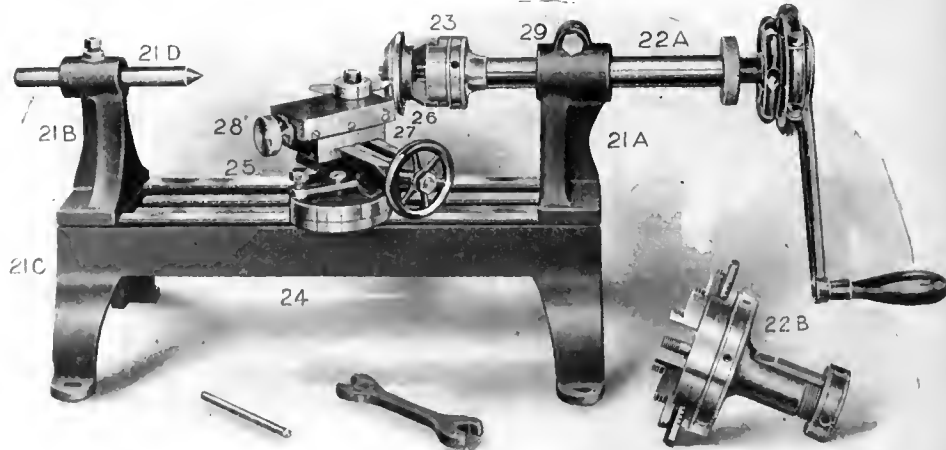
RE-MACHINING DEVICE FOR WORN VALVES.
